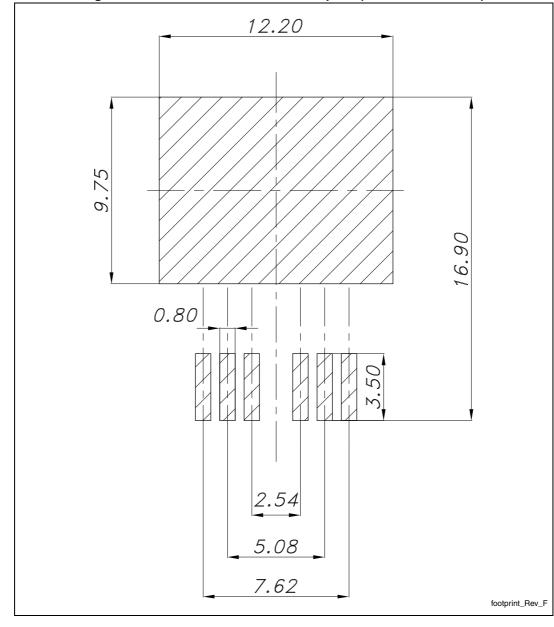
H²PAK-6 recommended footprint (dimensions in mm)
